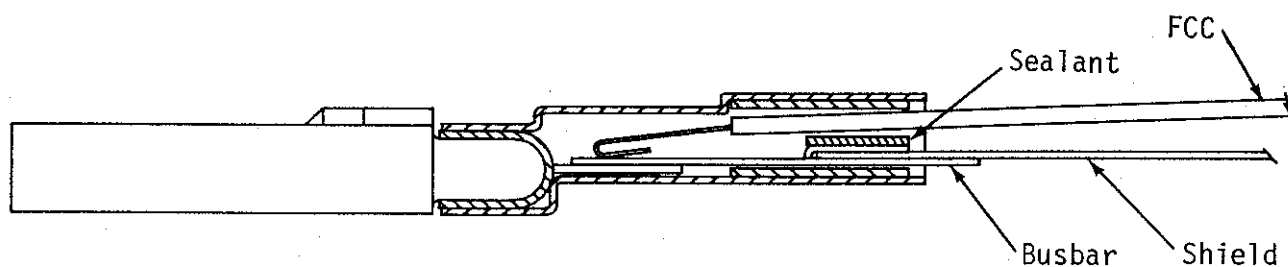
CTA-0055 Sealant Inserted Between FCC and Shield
